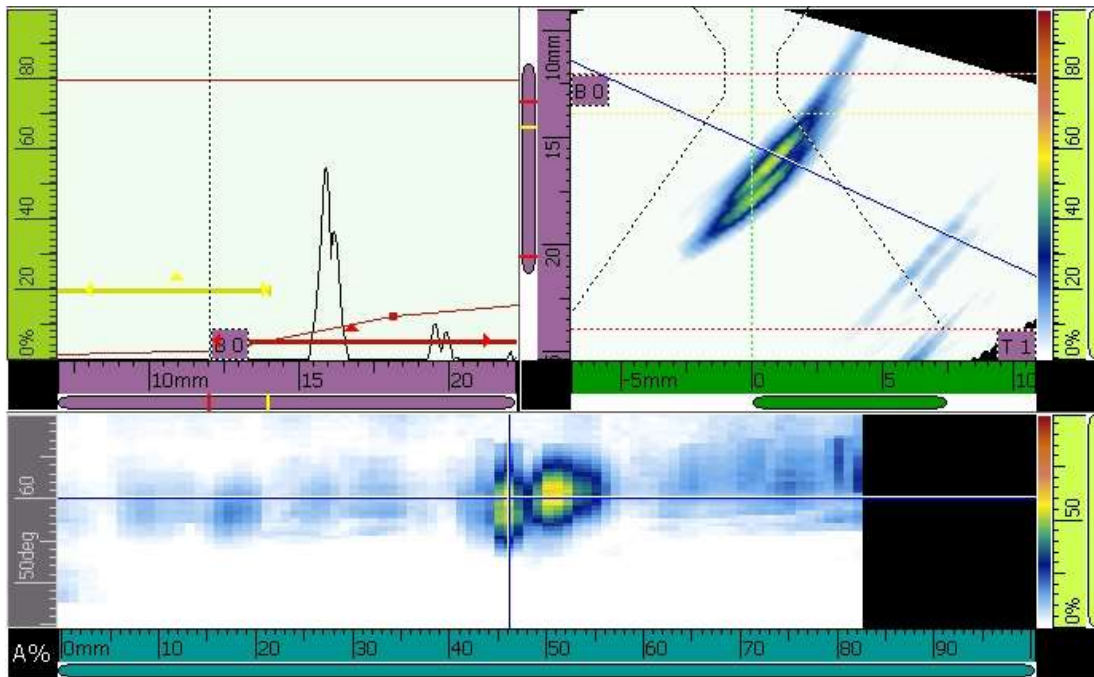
Defect map for lack of fusion observed with weld joint
